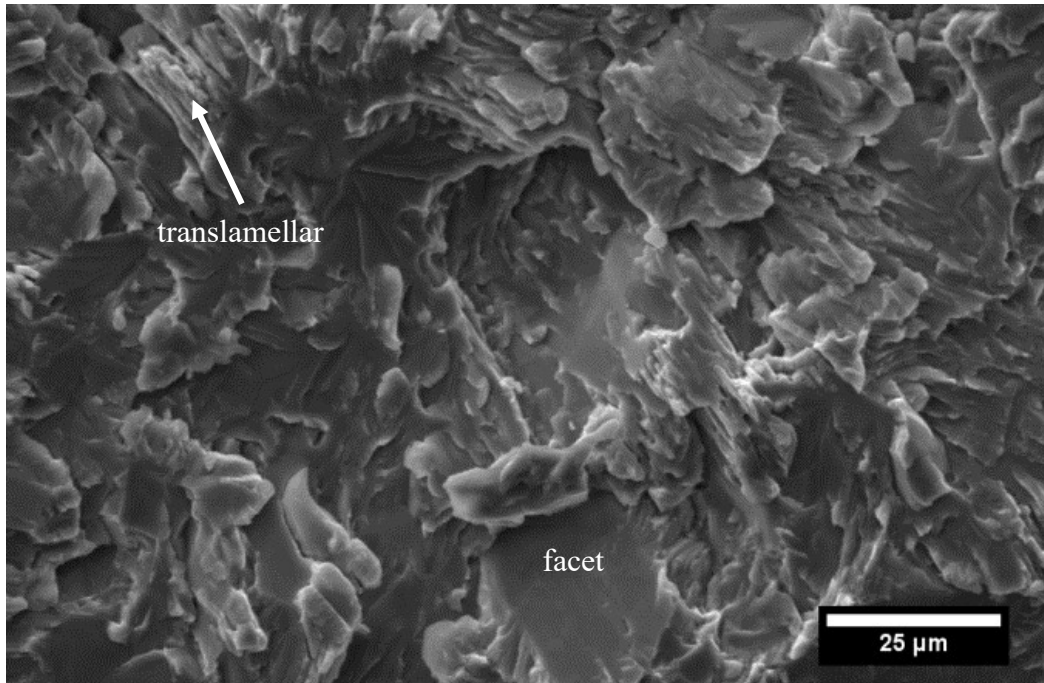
Representative fatigue crack SEM-SE fractography of as-cast + HIP (T-L) fatigue fracture features in the overload regime at  $R = 0.1$ . Crack direction is from top to bottom.
